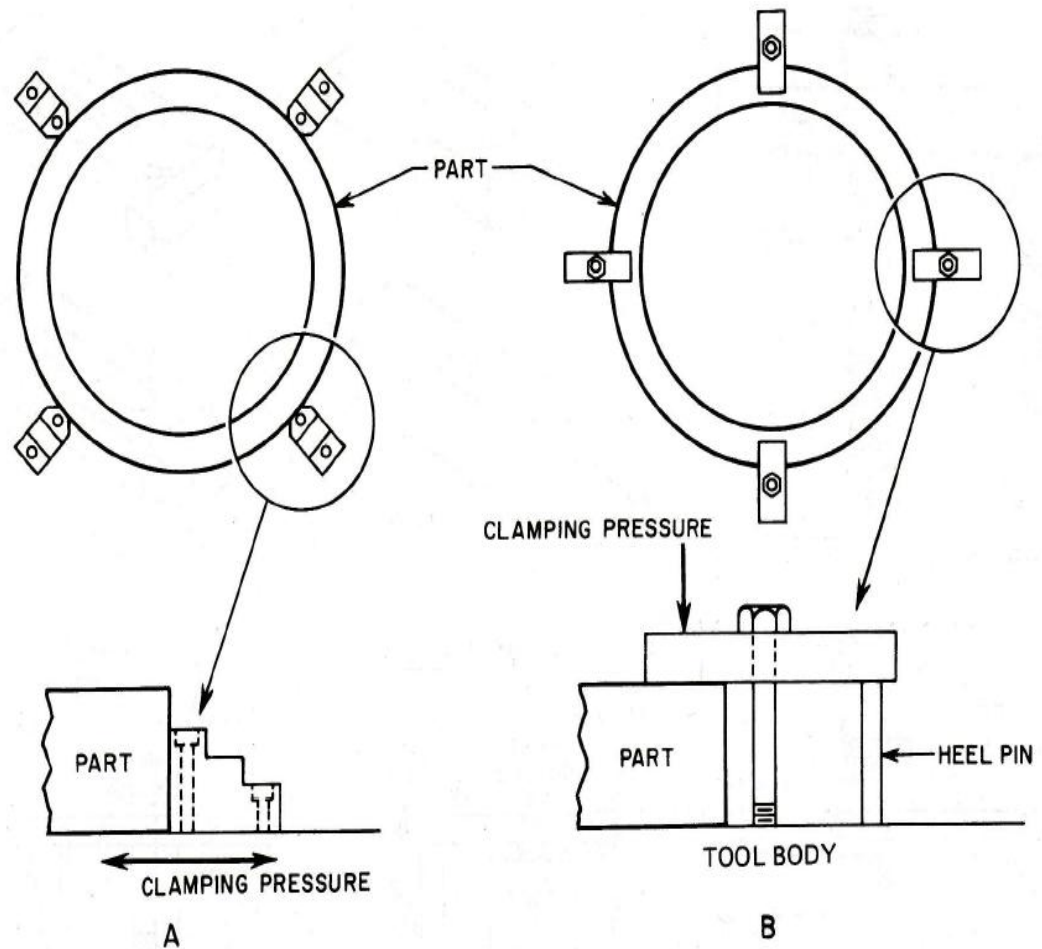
Clamping forces (Jig and Fixture design, Edward G. Hoffman, 2004)
